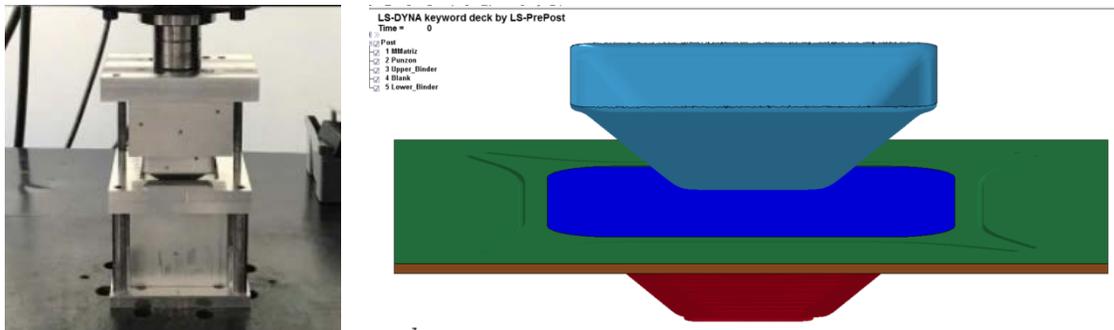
(Left) Stamping dies mounted in the Universal Testing Maching, (right) Stamping model at initial position.
